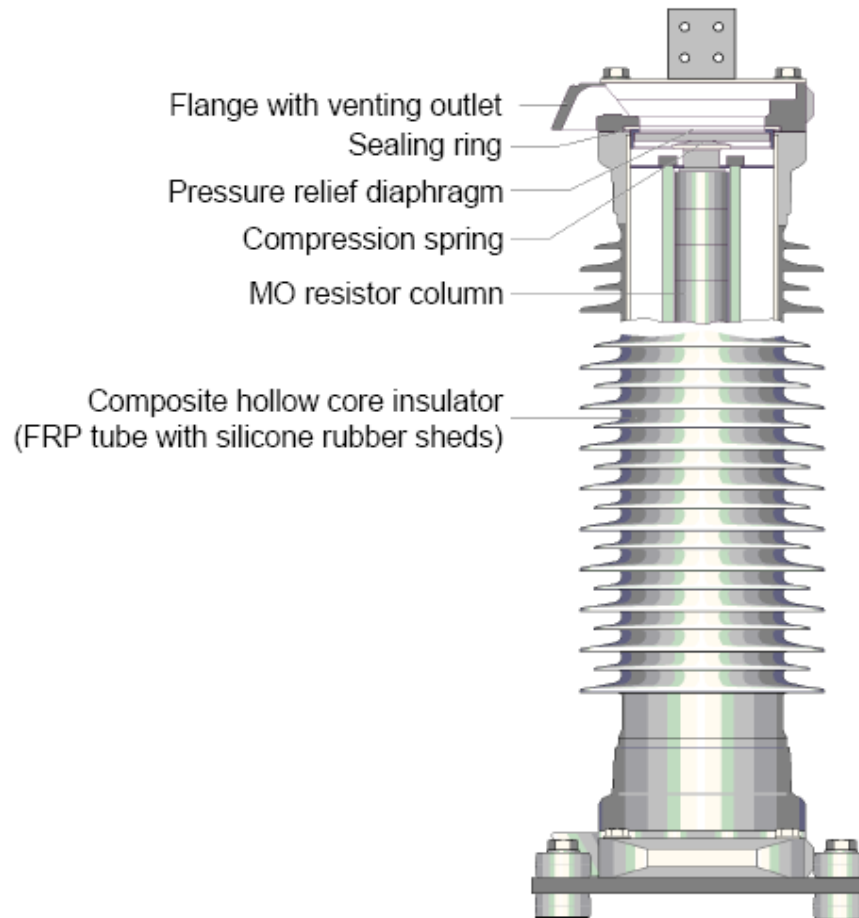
Cross-sectional drawing of the unit of a polymer housed high-voltage arrester (with composite hollow core insulator housing)
